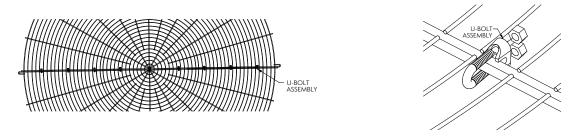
U-Bolt Assembly Spacing & Arrangement
